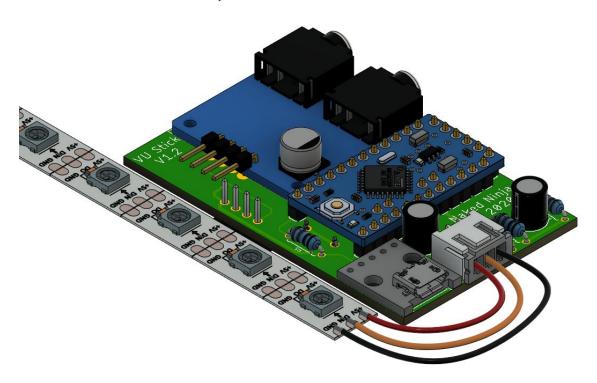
Angled bottom view of VU Stick V1.2 PCB with RGB LED strip connected.
